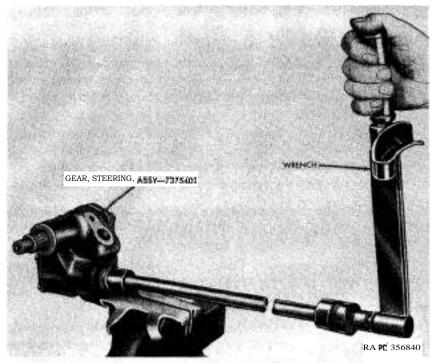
Checking preload of worm roller bearings with torque indicating wrench.
